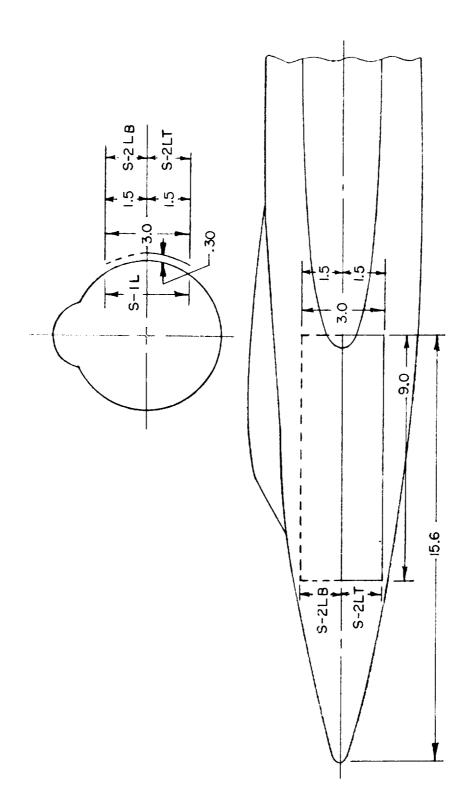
Two-view sketch of nose indicating size and location of slats. (All dimensions are in inches.)
